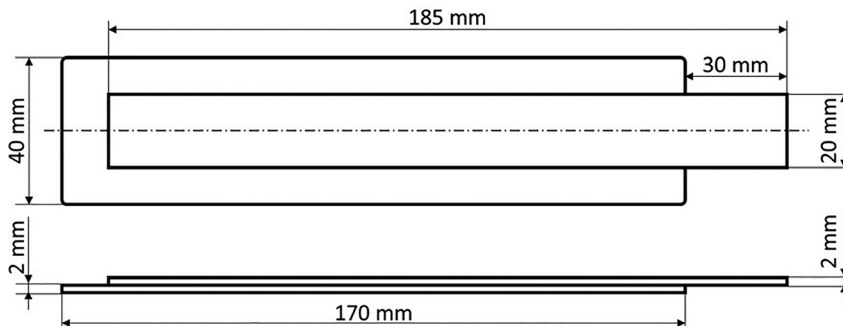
Dimensions of peel test specimen according to VDI 2019 guideline.
